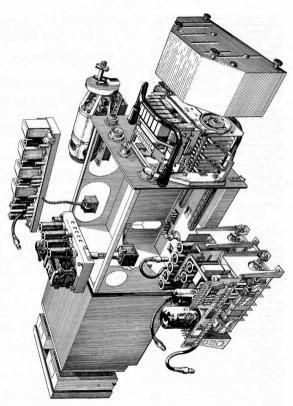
WITHDRAWAL OF UNITS FROM MAIN CHASSIS
